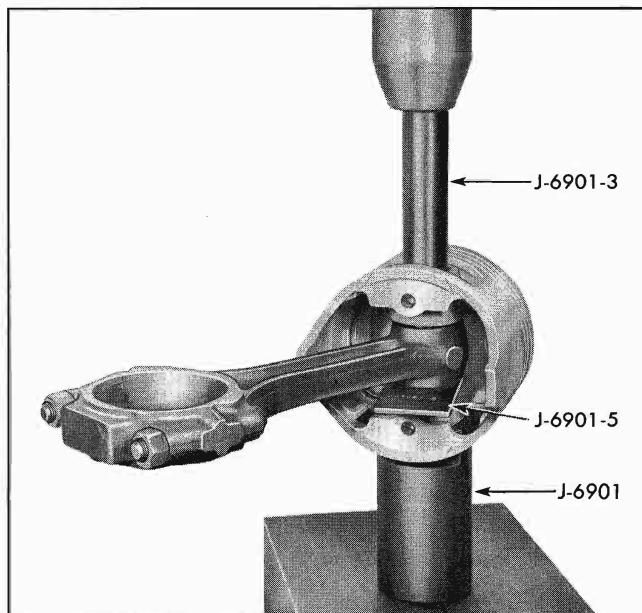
Piston Positioned in Arbor Press for Removal of Pin
